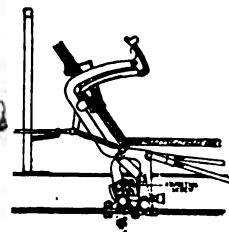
To adjust clutch opening fingers, turn the adjusting screw on the clutch pedal with the clearance between the fingers and the release plate is about 1/16 in. when the clutch is in. The release plate should then spin freely.
